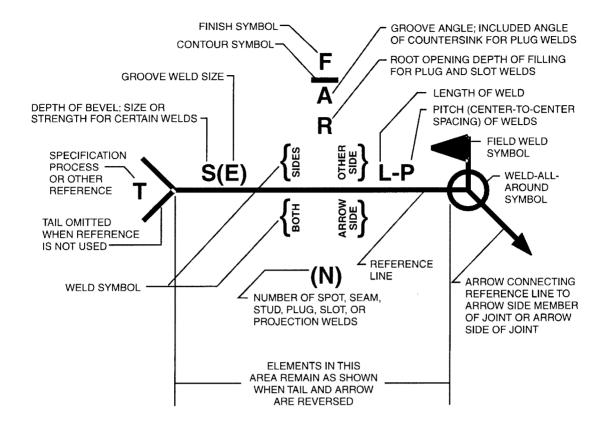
Standard Location of Elements of a Welding Symbol
